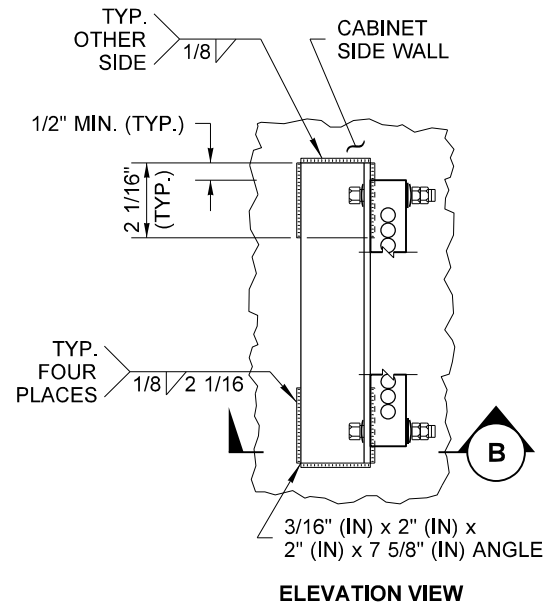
PHOTOCELL ENCLOSURE MOUNTING DETAIL
